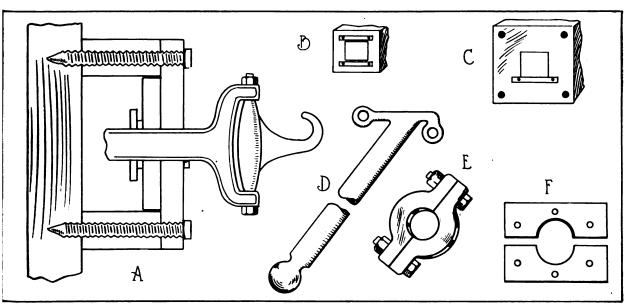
Parts of the Hoisting Device: A, Depicting Method of Attaching Spindle to Post; B and C, Wooden Blocks Utilized to Secure Spindle; D, Upper and Lower Ends of Arm; E, Bearing for Ball End; F, Retaining Plates for Ball Member,
